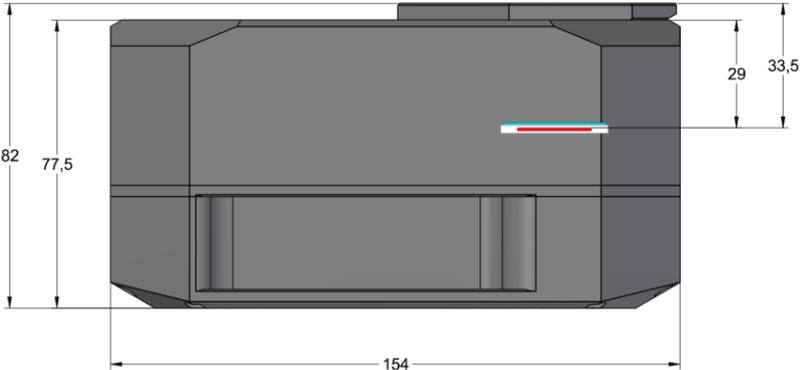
C3 camera head with Internal Filter Wheel side view dimensions
